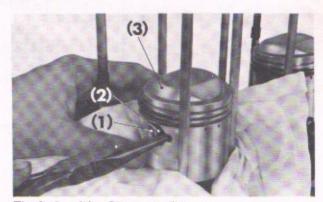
(1) Piston pin clip (2) Piston pin (3) Piston
